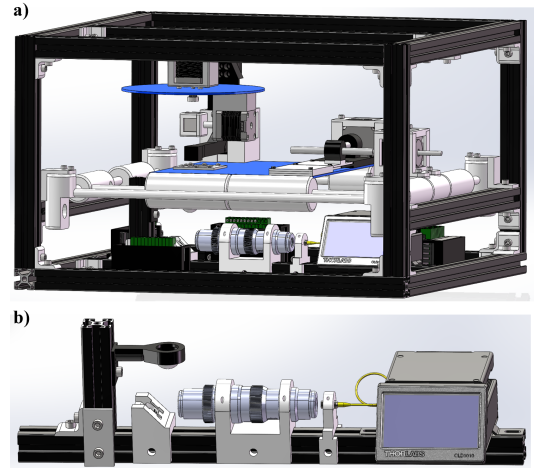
Updated design of the 3D printer. a) Assembly of the 3D printer including the new components. b) Assembly of the updated optical system for higher resolution printing.
